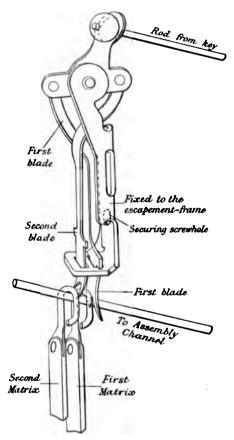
Typograph; matrix escapement. Scale: full size.
